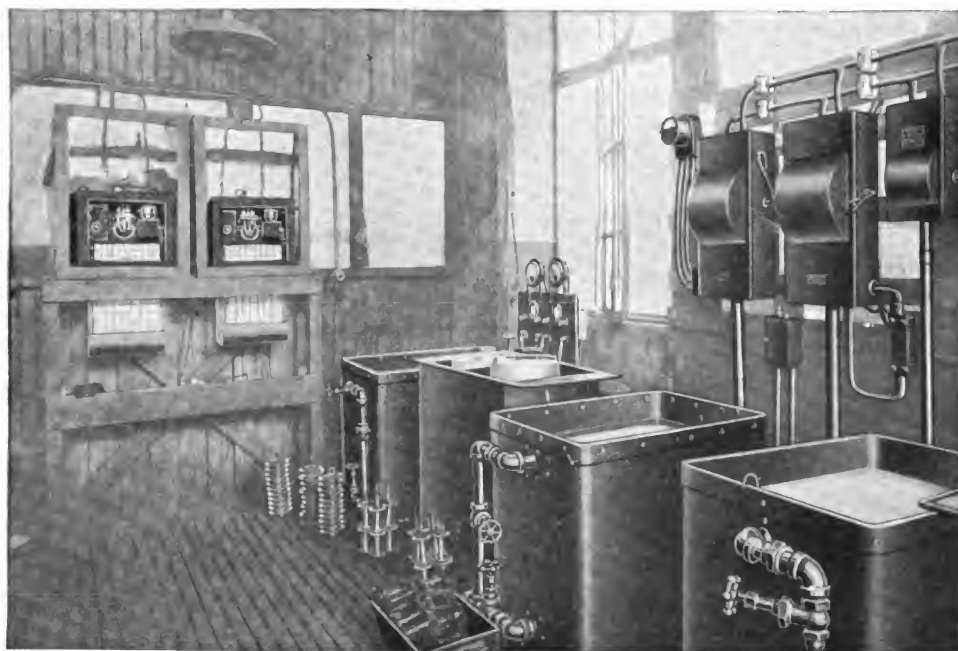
Heat treating equipment of Packard Motor Car Co., Detroit, used on gears for Liberty motors by the Hump method
